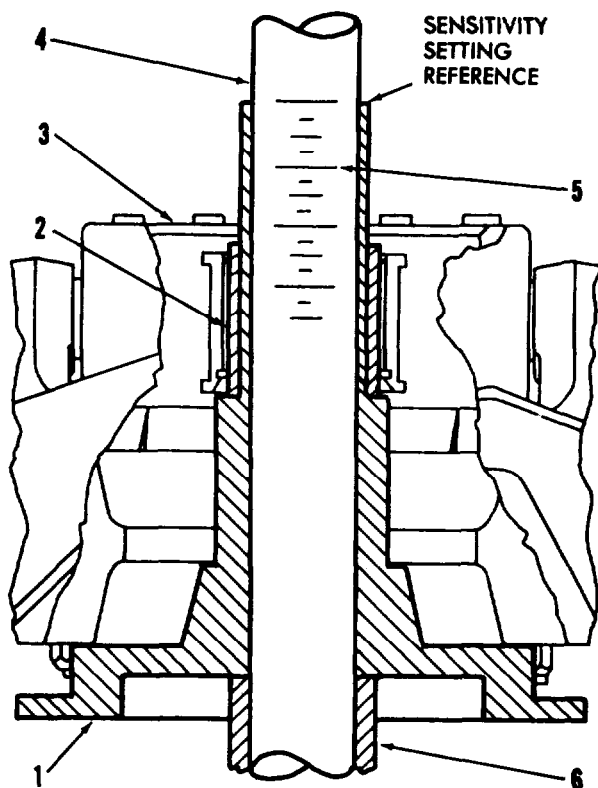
A. Balancer Installation - OH-13 Series S and TH-13T Helicopter Tail Rotor Hub and Blade Assembly
